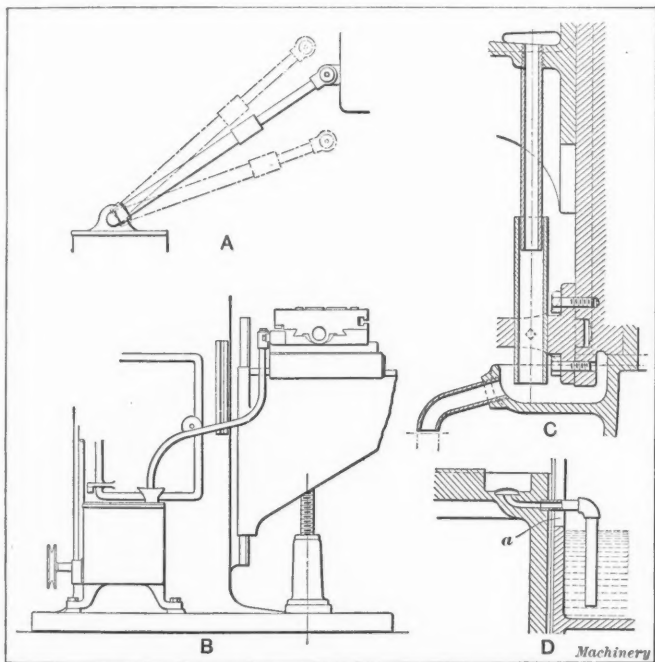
Drainage Connections to permit Vertical Adjustment of Work Table
